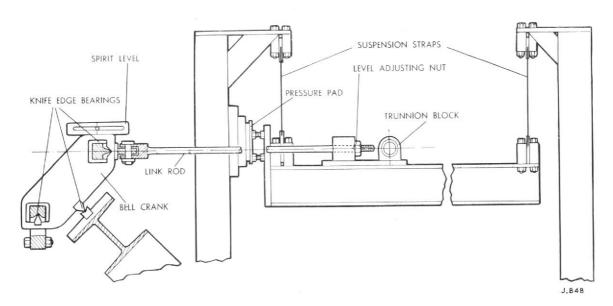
Diagram showing essential points to be considered when lining-up and levelling the test bench loading gear.
